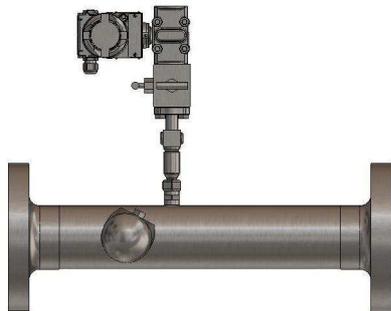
Spool Piece (flange ends) with integrated DF12 with mounted manifold and dp transmitter.
